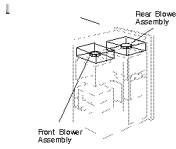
Rackmount Chassis Component - Blower Assemblies
